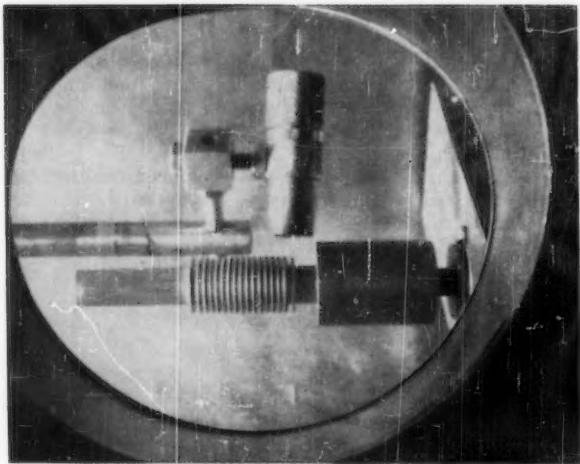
Sealing the capsule in the weld chamber.
